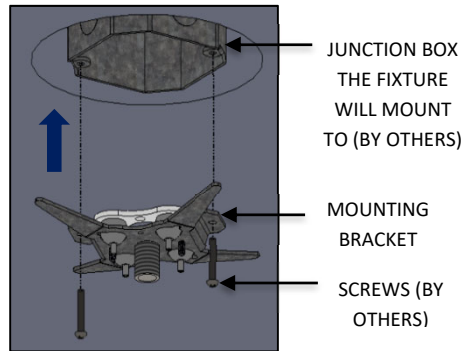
MOUNTING BRACKET ASSEMBLY INSTALLATION
